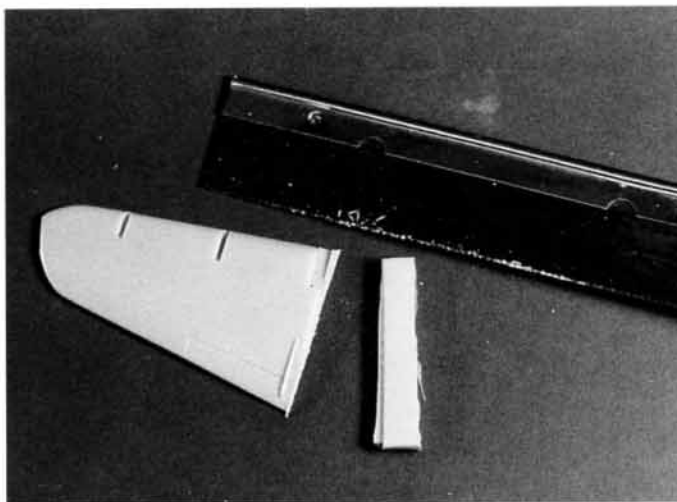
The first step in working with resin control surfaces is to remove the part from its pour block. Be careful when you do this, as these parts are easily damaged.
